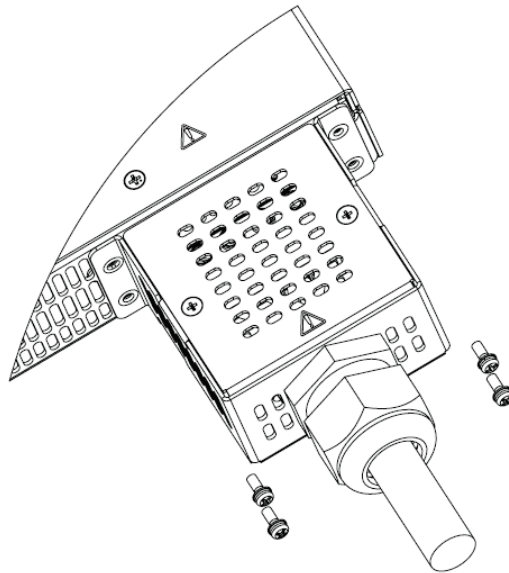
Strain Relief Assembled to Power Supply Rear Panel
